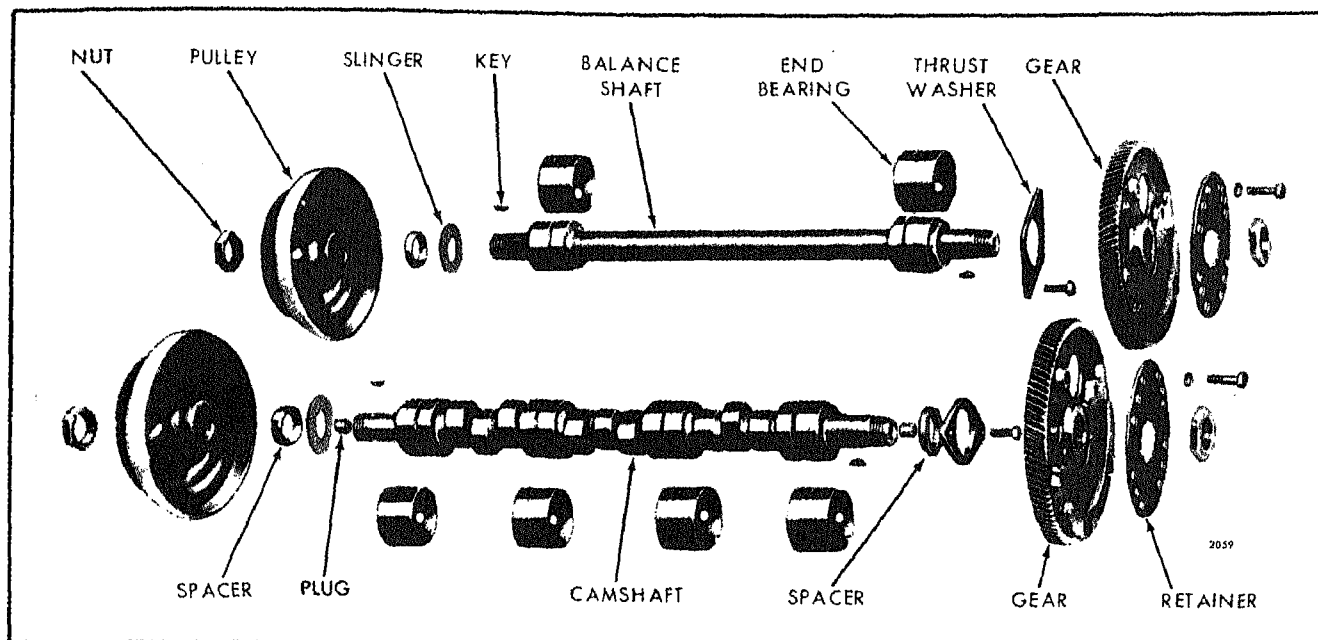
Camshaft and Balance Shaft Details and Relative Location of Parts
